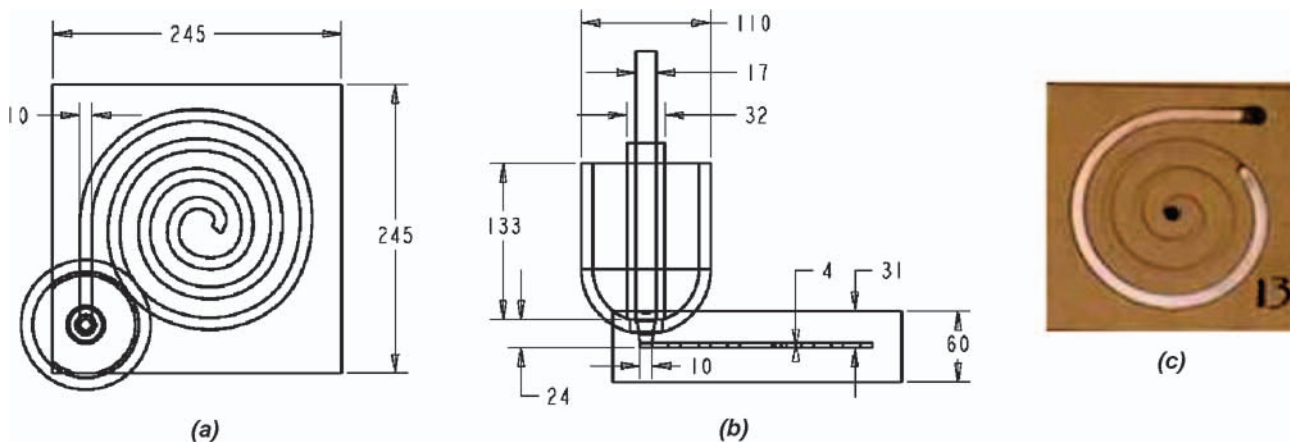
Drawing of the spiral mould showing a) top view and b) side view of stopper rod, pouring cup and sand mould (all dimensions are in mm); c) open mould and casting specimen.
